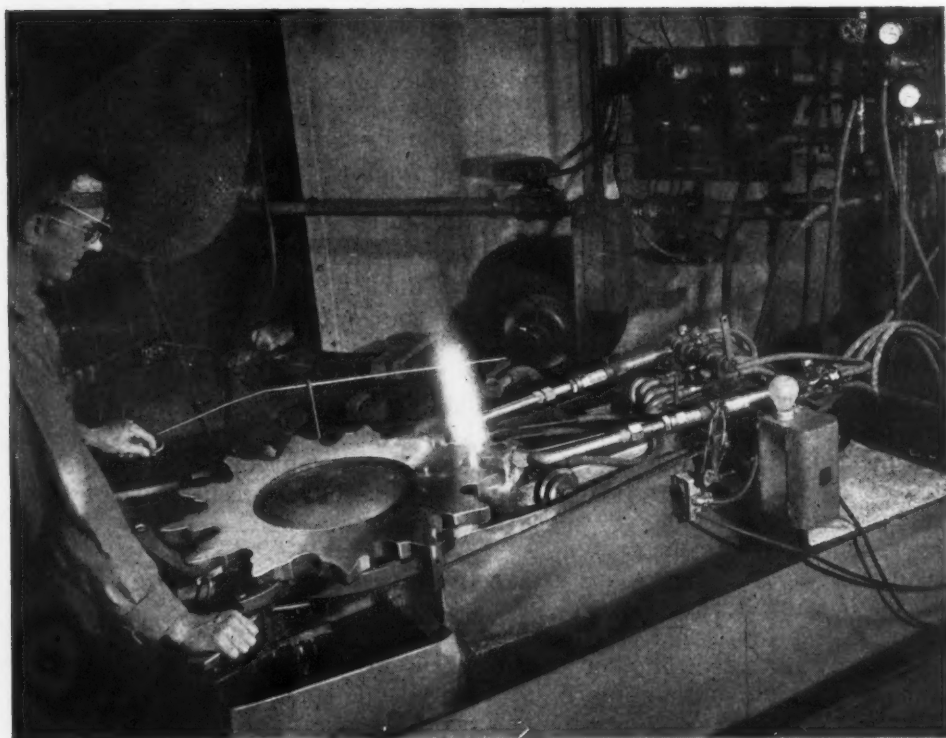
Semi-automatic Machine Used for Spot Flame-hardening Tank Sprockets
